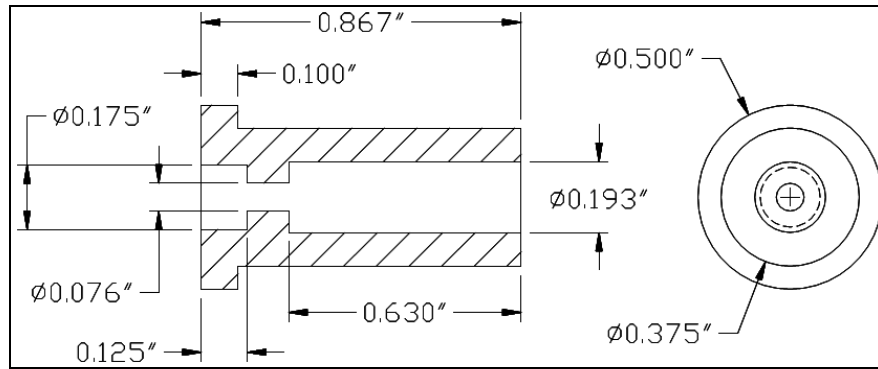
Dimensioned drawing of 0.22-cal. custom case.
